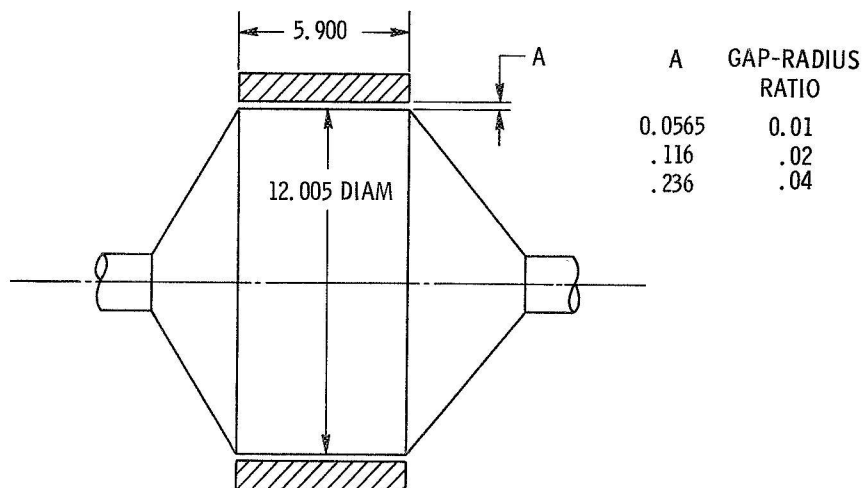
Cylindrical rotor-housing configuration. (All dimensions are in inches.)
